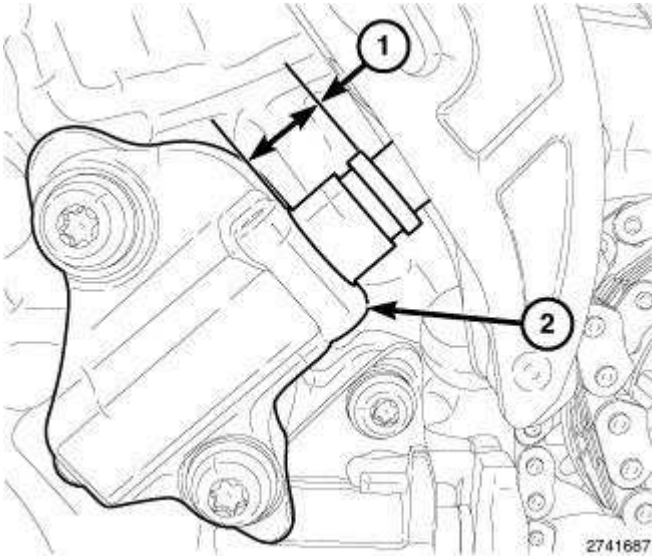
Piston Extension & Right Hand Cam Chain Tensioner
